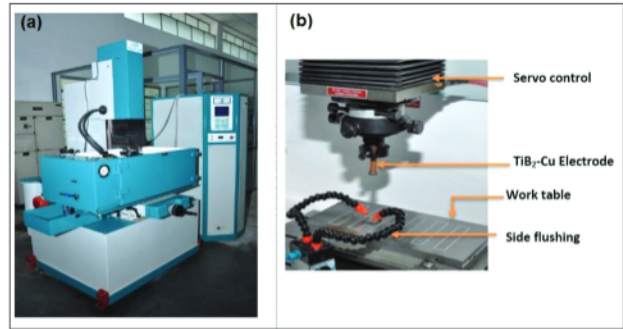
a) Electra 3355 EDM machine, b) EDM set-up
